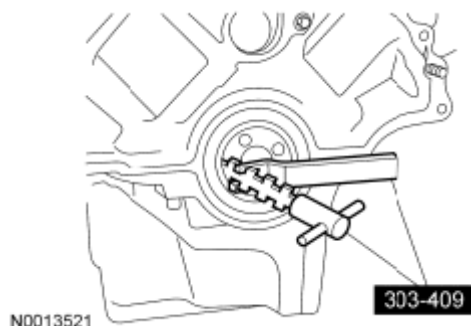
Removing Crankshaft Rear Seal Using Special Tool
